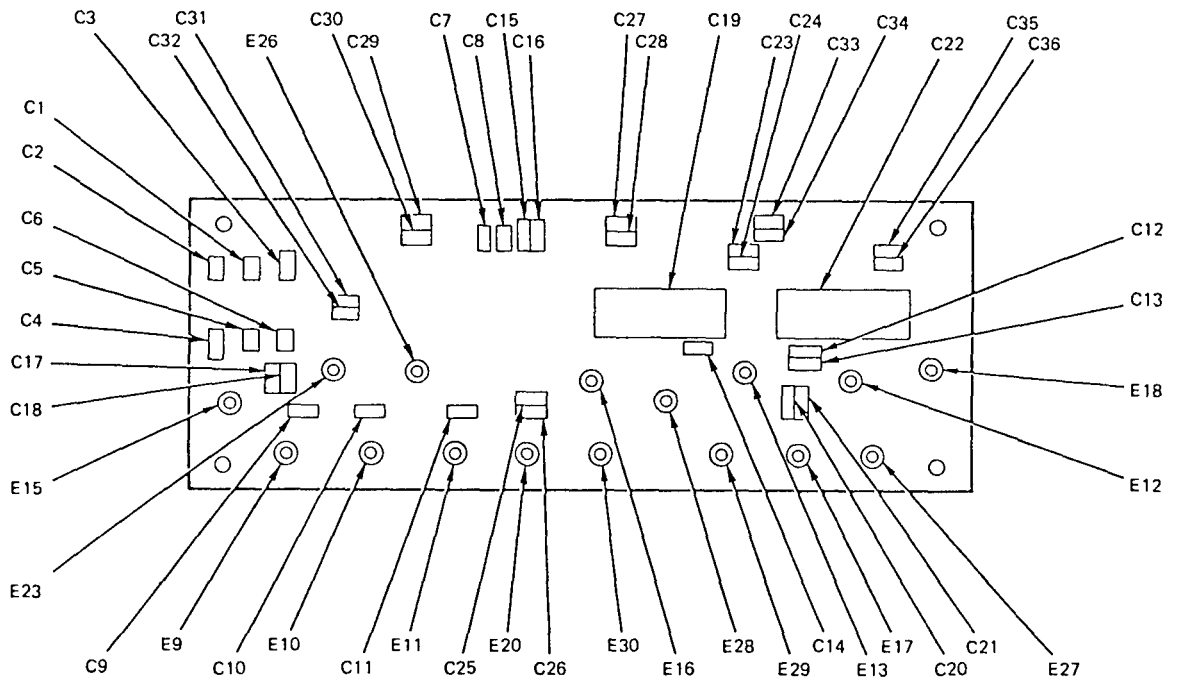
Output Filter Circuit Card Assembly A9 Parts Location Diagram
